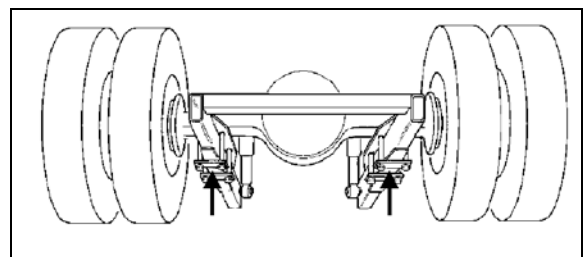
JACKING POINTS ON DRIVE AXLE OEH3B762
